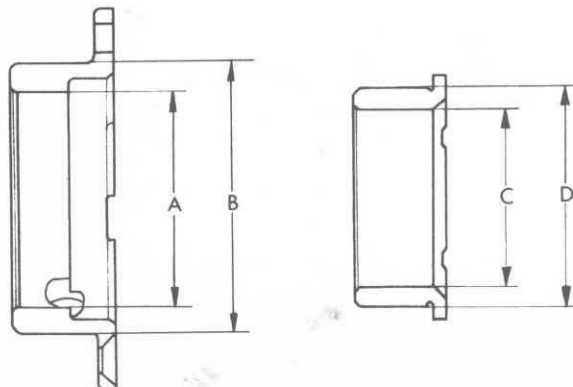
22 Tolerances on diameters and bores of main bearing and its support at the flywheel end of crankshaft
